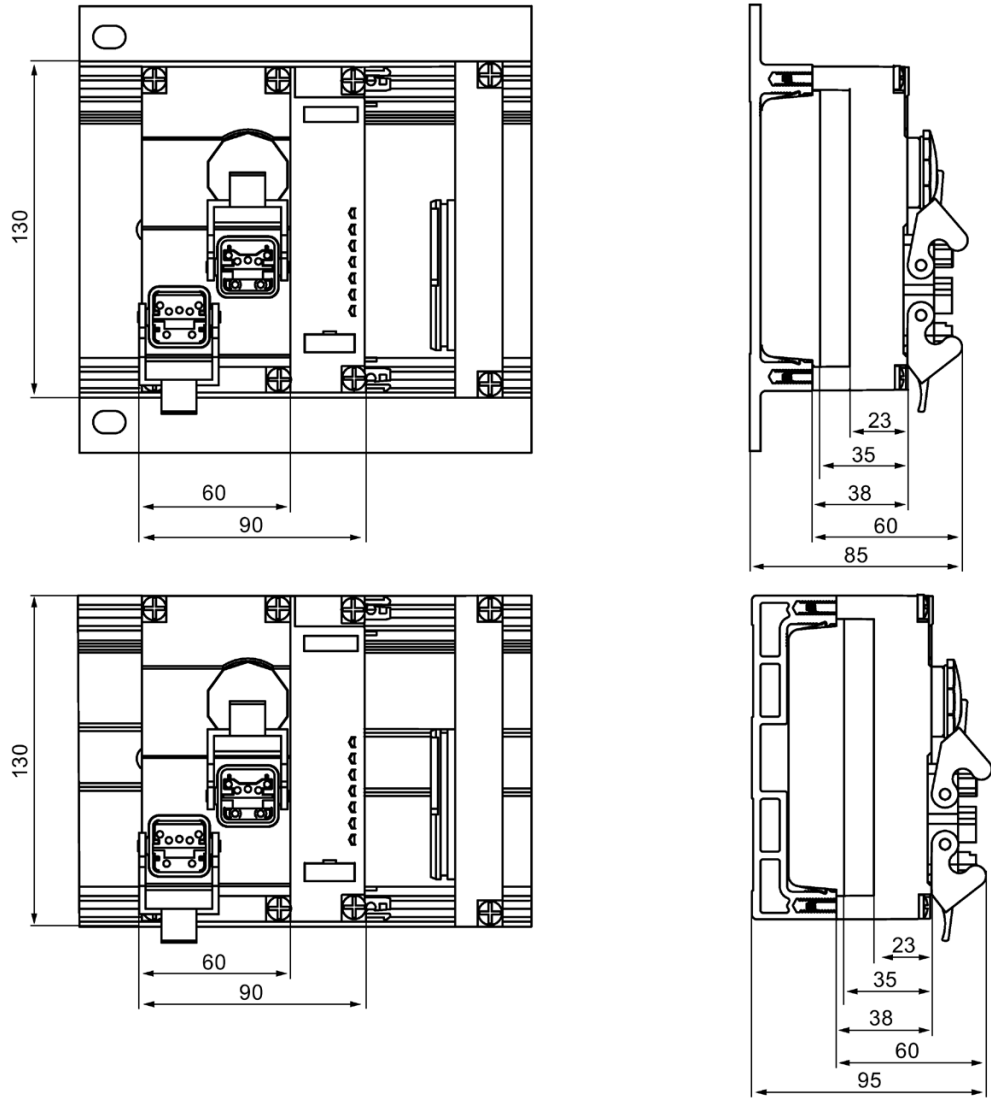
Dimensional drawing of IM 154-2 DP High Feature interface module with CM IM DP ECOFAST Cu connection module
